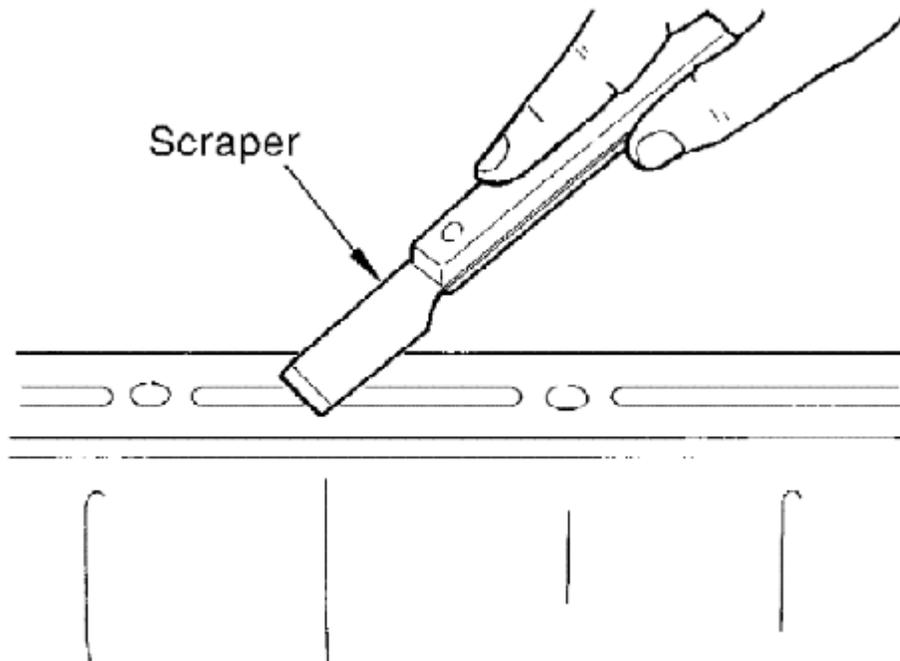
Removing Old Liquid Gasket From Mating Surface Using Scraper
